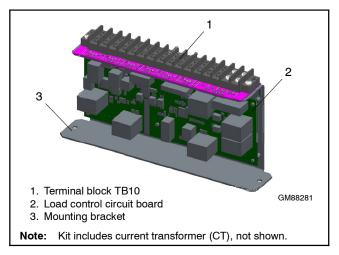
Load Shed Assembly GM88281-1 (mounts inside the transfer switch enclosure)
